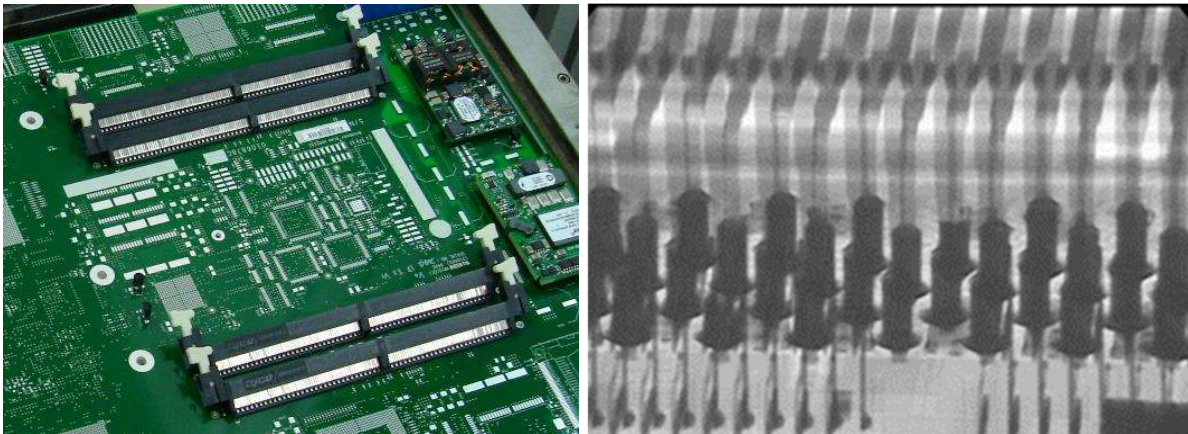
Multiple 240-pin dual in-line memory module (DIMM) connectors mounted in 22-layer printed circuit board assembly (left), and X-ray image of 100% PTH fill (right)
